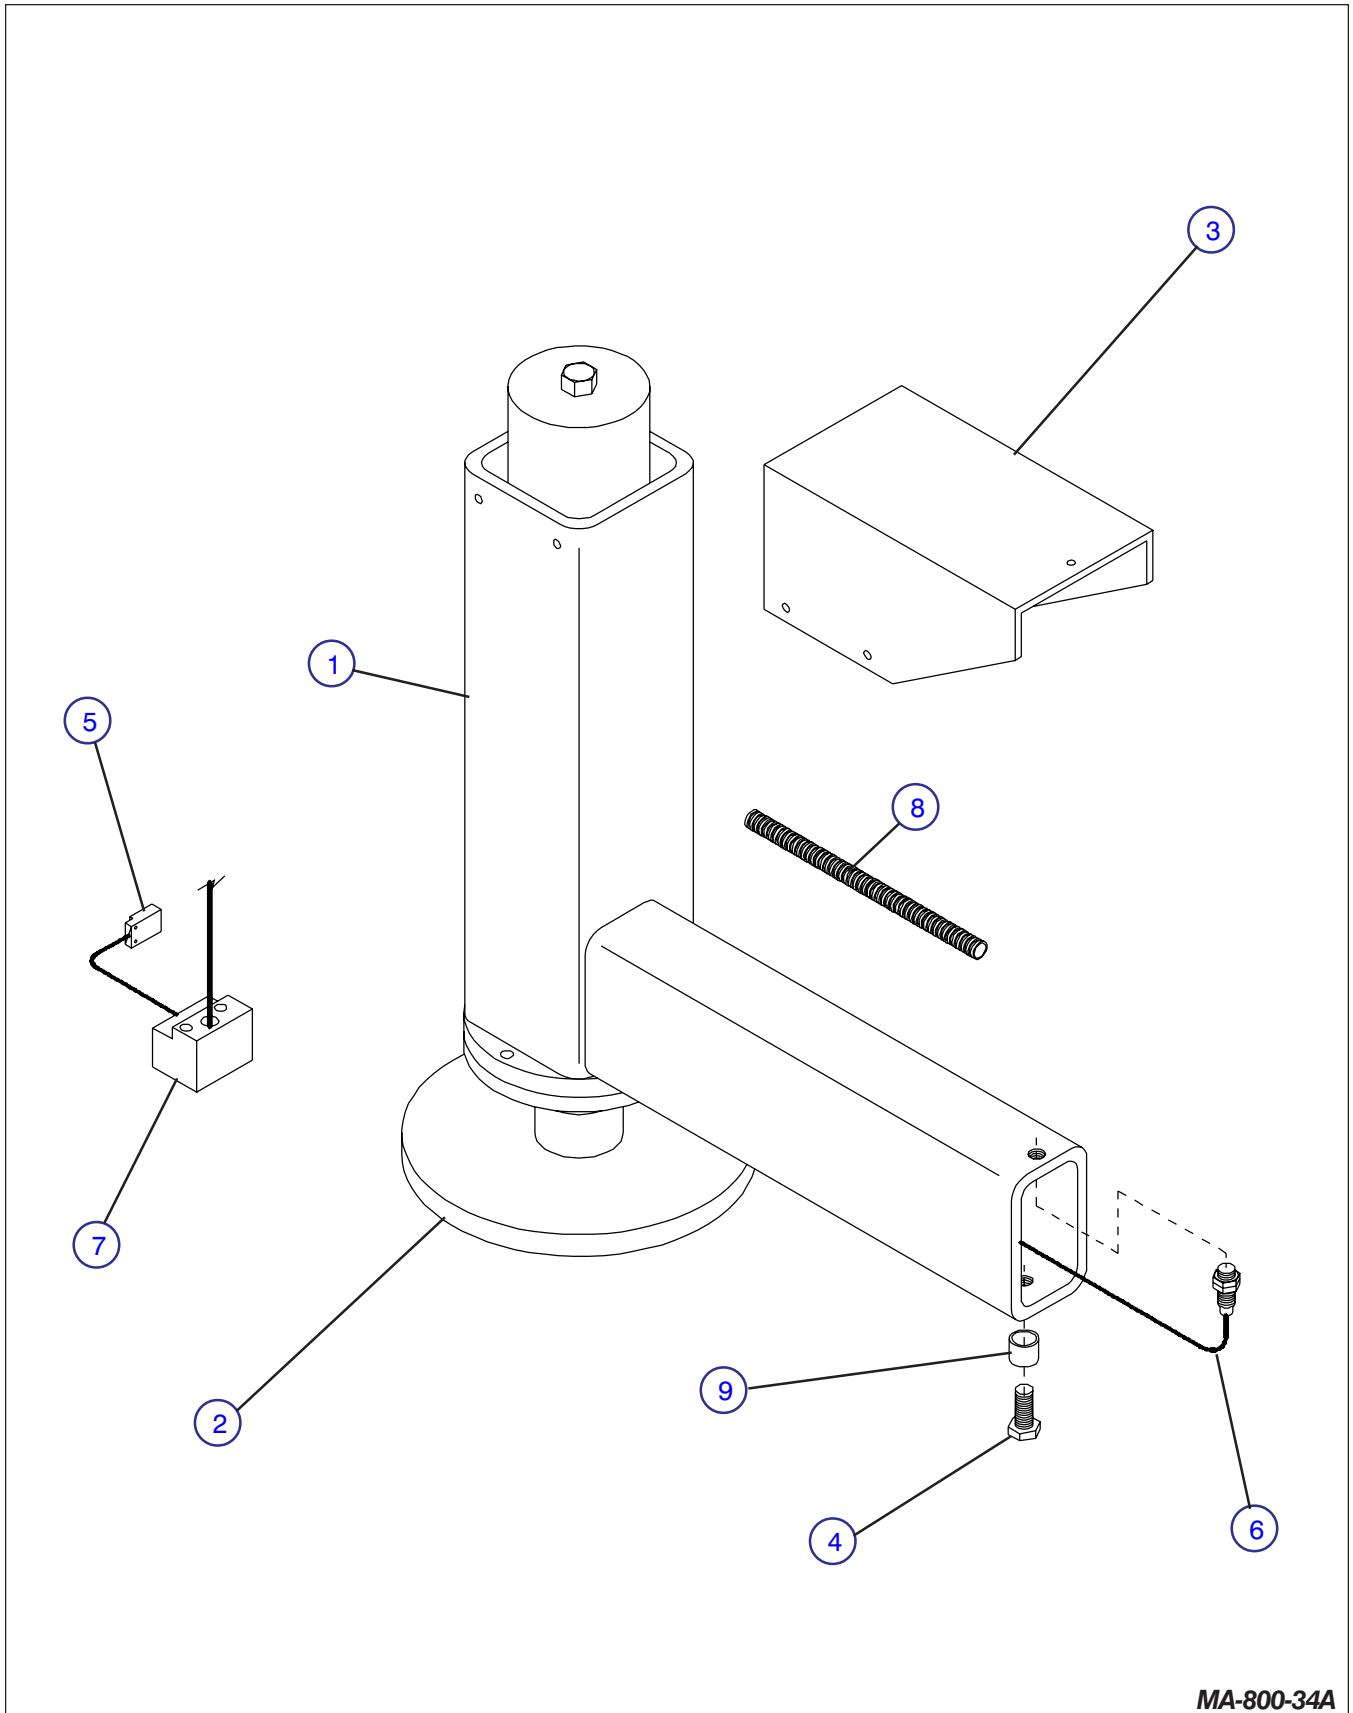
D. Base Control/Electrical Panel Assembly - ANSI/SIA And CSA
